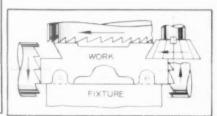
, at left, shows a typical workpiece which can be machined on a universal miller. A ram-type universal miller, such as the Van Norman, would also handle this work with a minimum of resetting and cutter change. Fig. 3, below, shows cutter arrangement for a multi-spindle production miller to machine three sides of a part in one pass. By adding two extra vertical spindles—sometimes done on special machines—as indicated at right the dovetails could be milled coincidentally with the other surfaces.
